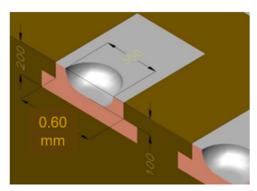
Dimpled NiPdAu plated IO pad on the 7x7 mm QFN to enable wettable flanks and inspectable joints.
